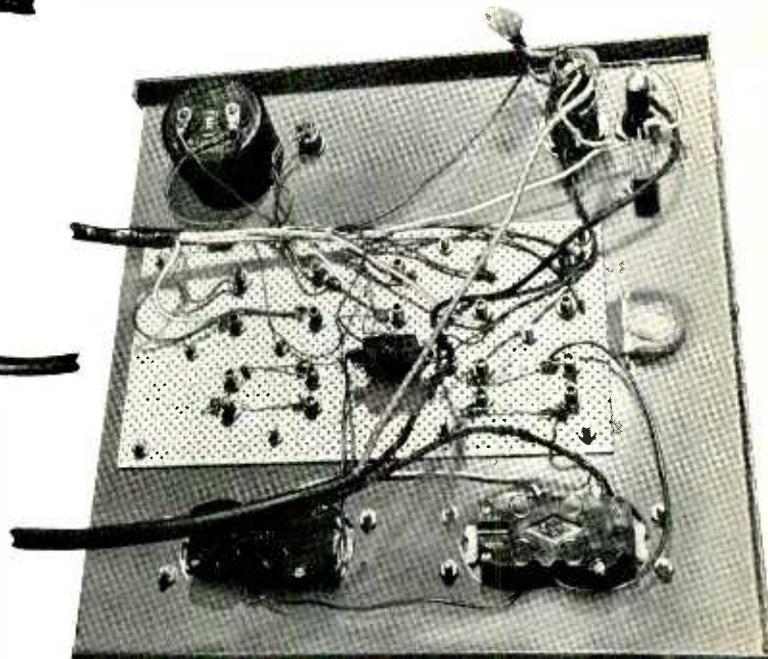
This view shows the bottom of the board in the prototype with point-to-point wiring using No. 14 stranded copper hookup wire.
